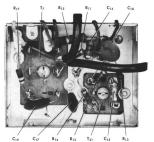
BOTTOM VIEW OF 2ND CONVERTER UNIT - COMPONENT LOCATION
